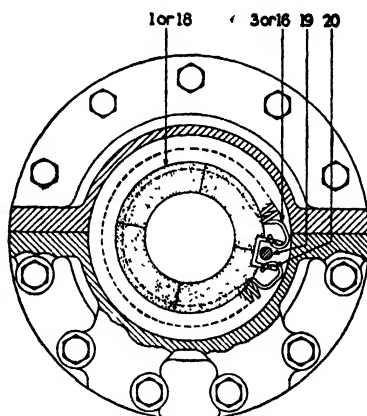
Section through carbon packing. 18 indicates carbon rings; 16 indicates spring. (General Electric Company.)
